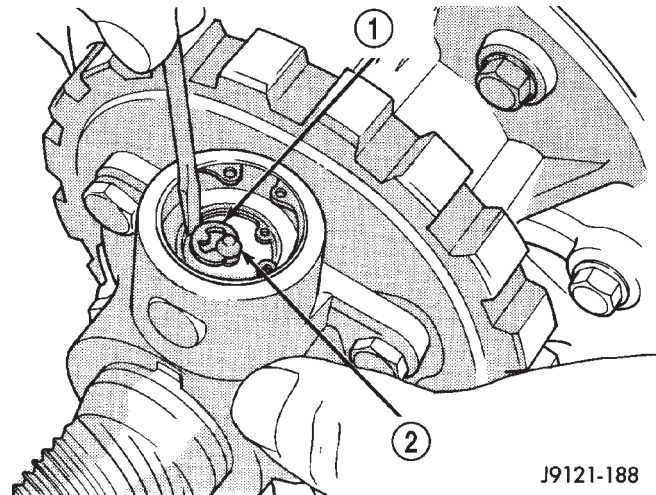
Governor Valve And Output Shaft Spotface Alignment
